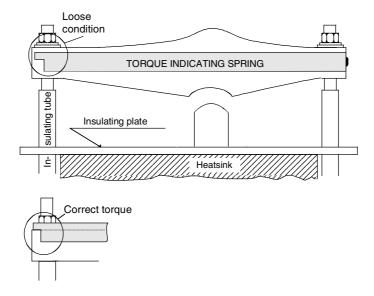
Aluminium spring with welded indicating spring
